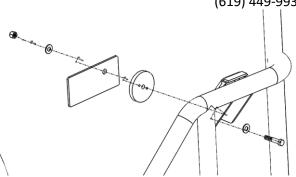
Center Mount Hardware Assembly (No Door Shown)
